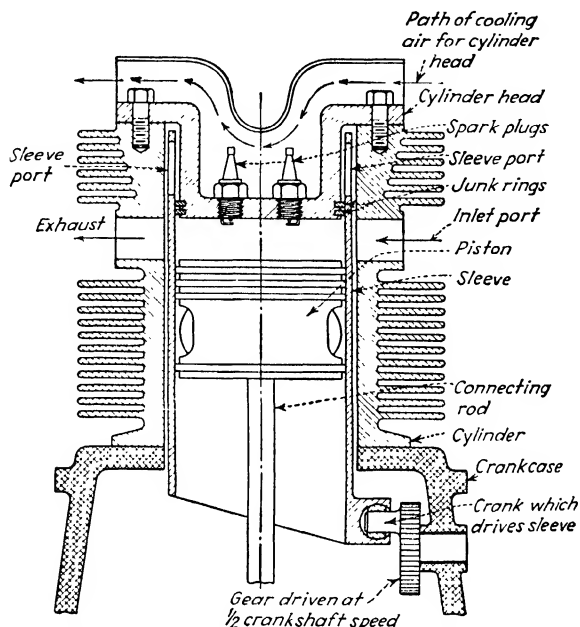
Sleeve-valve air-cooled cylinder (clearances around sleeve are exaggerated for clarity).
